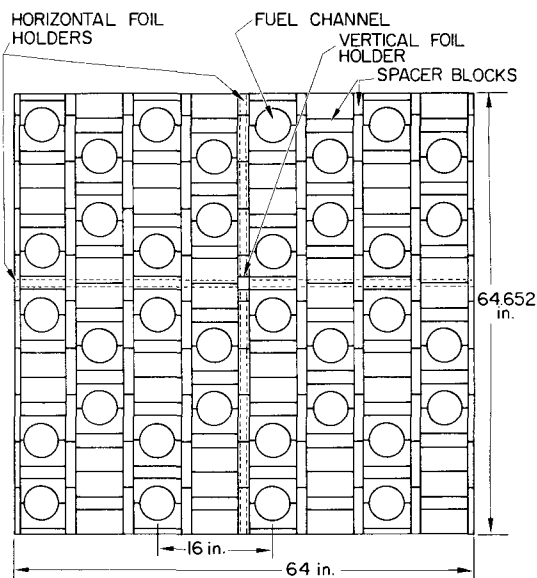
Sixteen-Inch Hexagonal-Type Assembly
